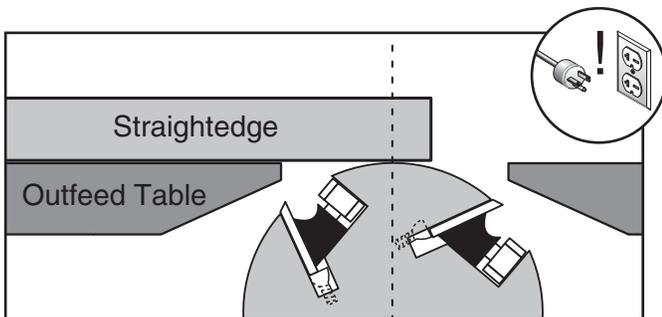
Adjusting outfeed table even with cutterhead body (knife-style cutterhead shown).
